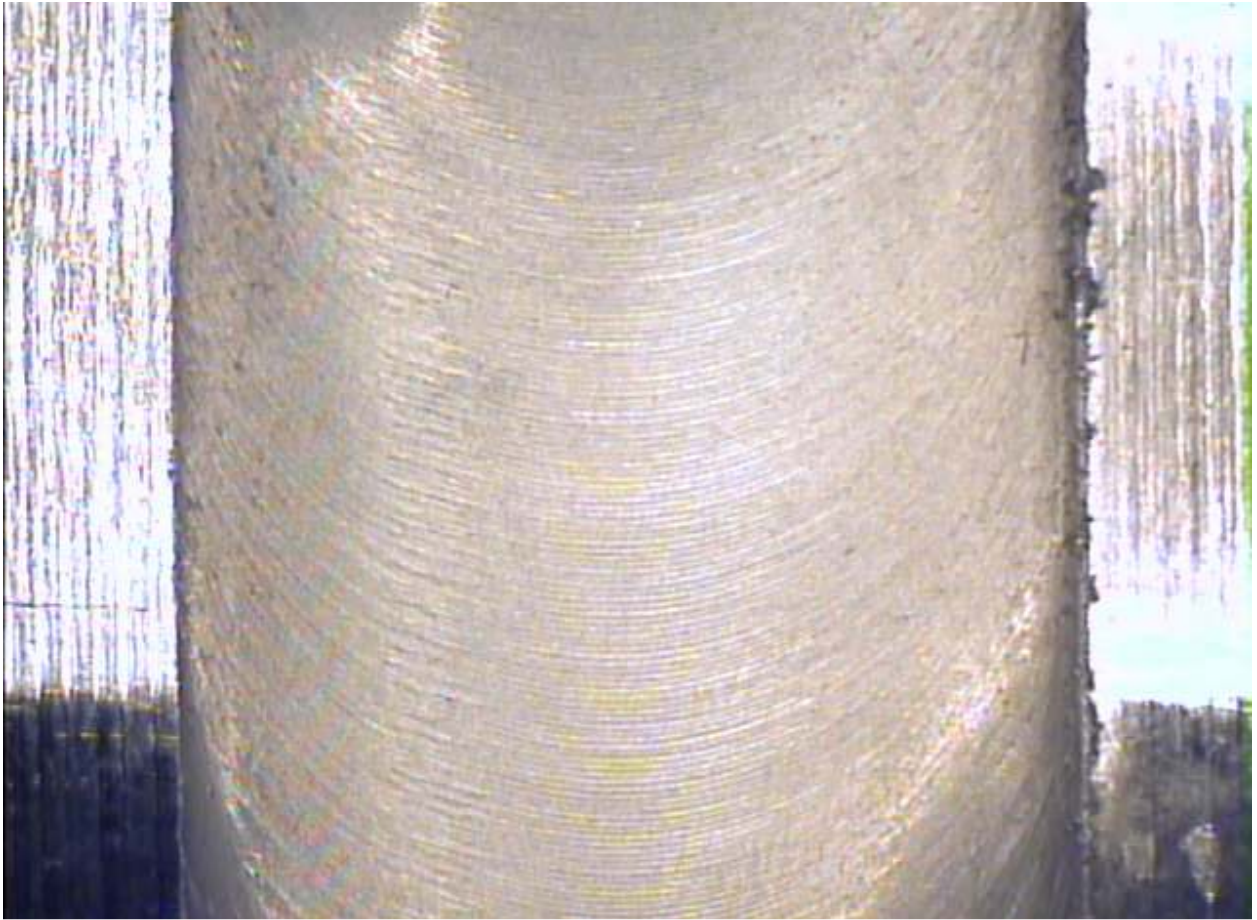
The superficial appearance of a typical welded pipe specimen (close)
